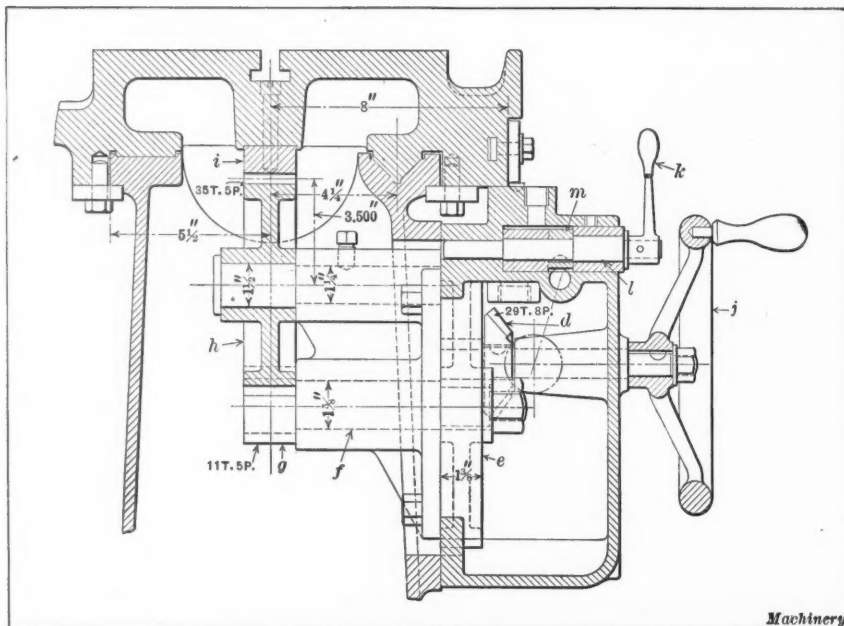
Sectional View through Feed Control Box, and Portion of Gearing employed in driving the Table of Keyway Milling Machine
